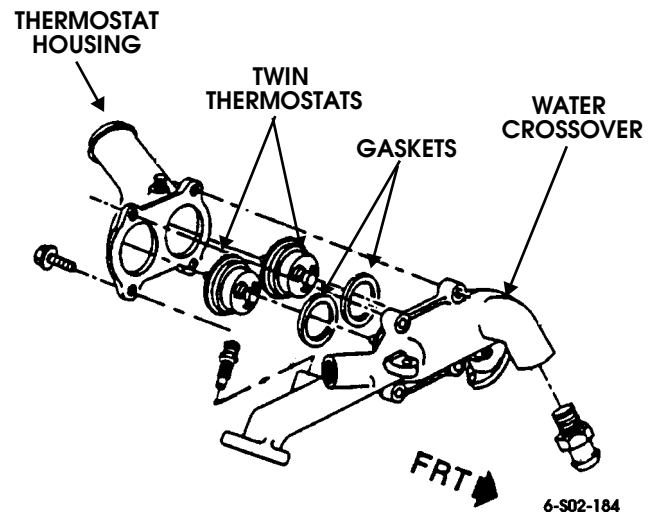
Thermostat and Cover Removal and Installation (Turbo Diesel)
